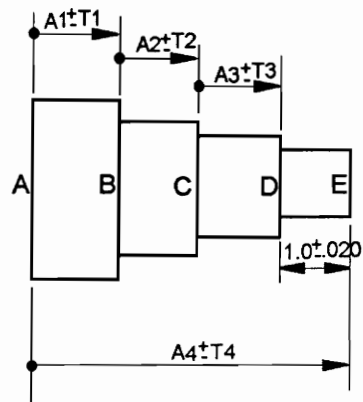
The Tolerance Chain of the Dimension DE
